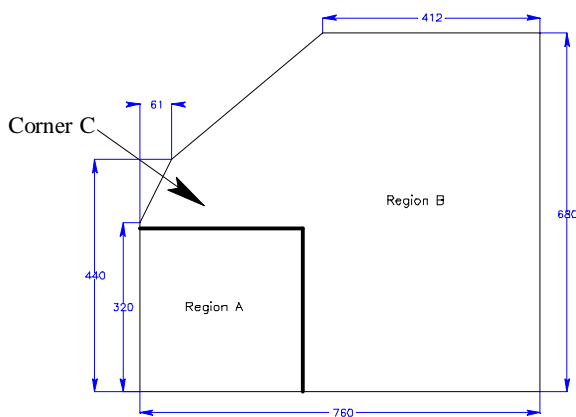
Dimensions of Tailor Welded Blank in mm.
